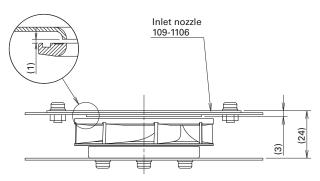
Dimensions of new model with inlet nozzle installed (unit: mm)
